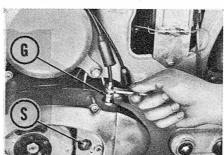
The clutch is adjusted at screw (S) and cable guide (G). Refer to text for procedure.
